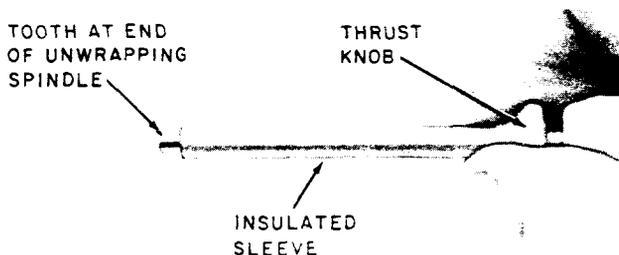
KS-20827 Wire-Unwrapping Tool—End View Showing Unwrapping Spindle Pushed Forward
